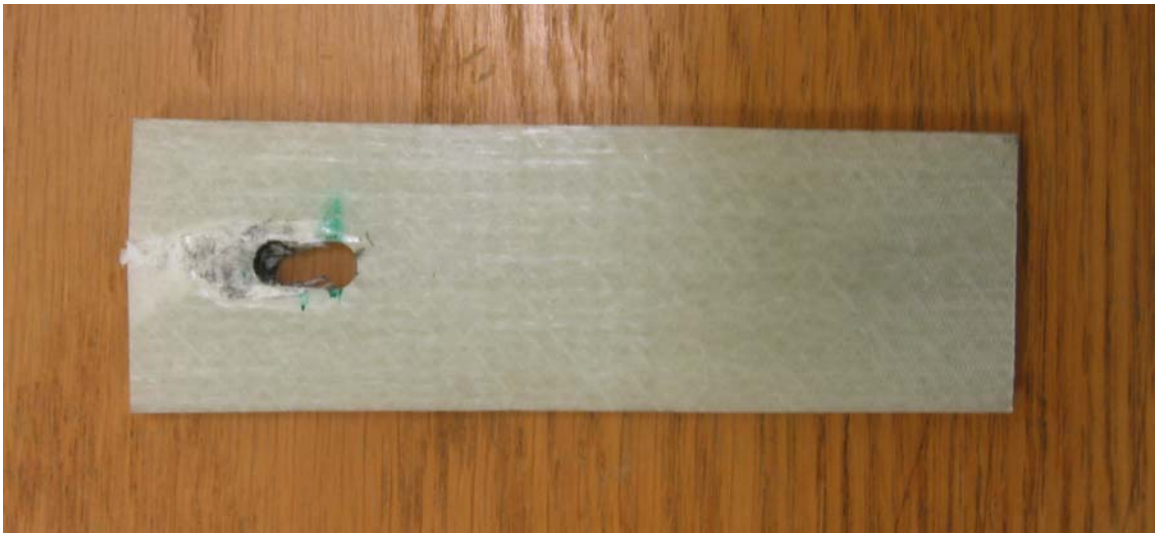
E-glass/epoxy BT coupon post failure. Tearout failure resulted in large bearing pin displacement.
